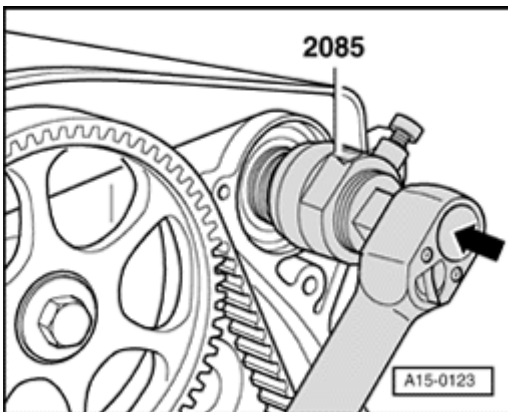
Screwing Threaded Head Of Seal Extractor With Forced Pressure Into Oil Seal
